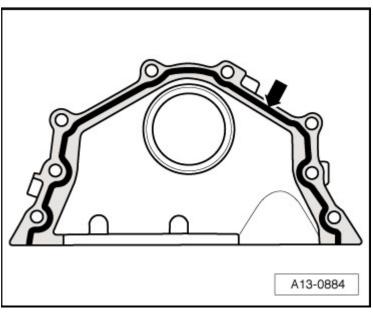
Applying Thin Bead Of Sealant To Clean Sealing Surface Of Sealing Flange Courtesy of AUDI OF AMERICA, LLC
